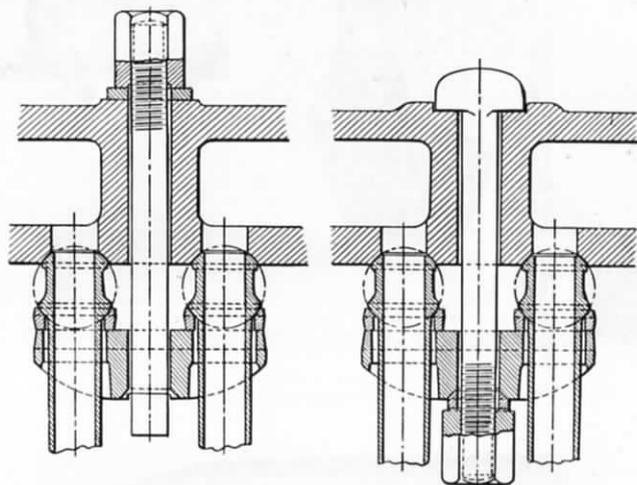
"MeLeSCO" JOINT ATTACHMENT.
